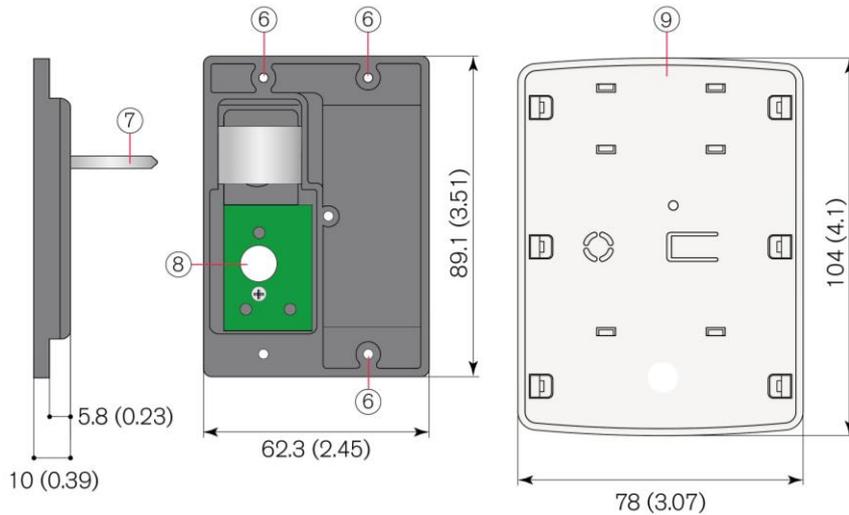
Dimensions of the GAT NET.Lock BoltSet 7220
